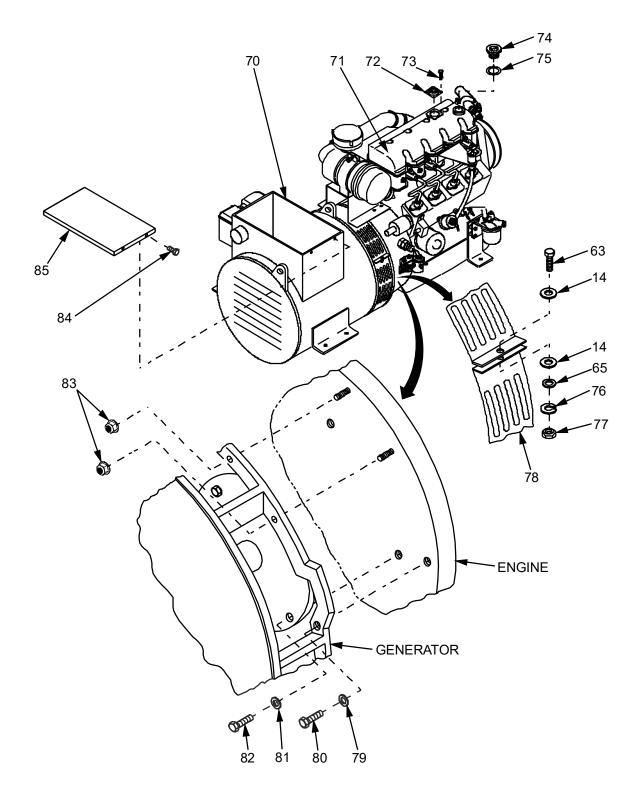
Engine-Generator Assembly 1013012 (Sheet 5 of 7).
